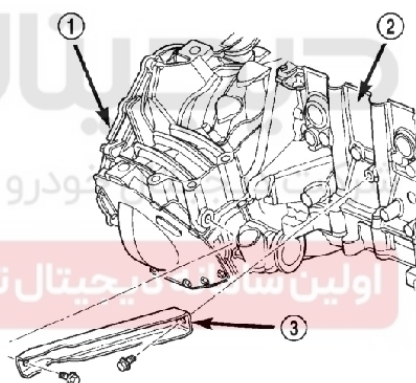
Disassembly/assembly of right horizontal curved bar — typical
